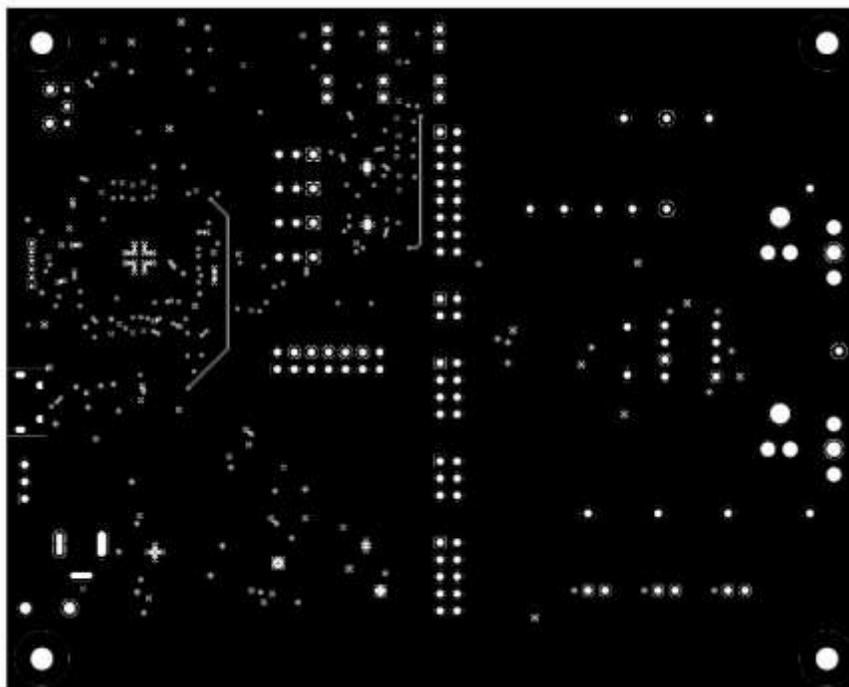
PCM175xEVM PCB Mid-Layer 1 Layout (Ground Plane)
